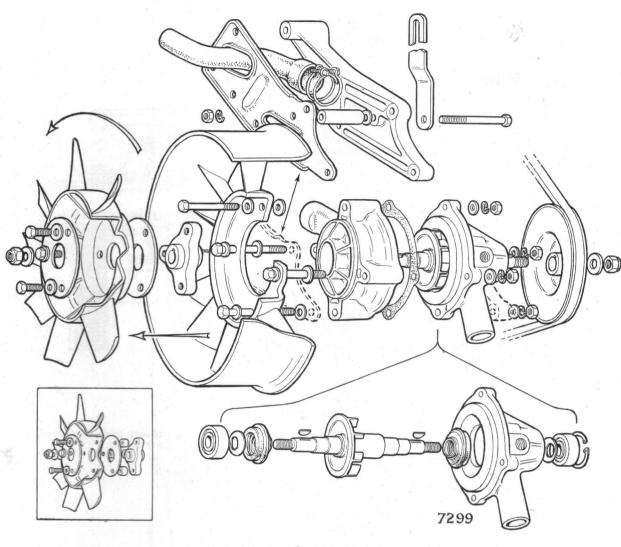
Exploded view of water pump and fan assembly (Inset shows early fan unit)
